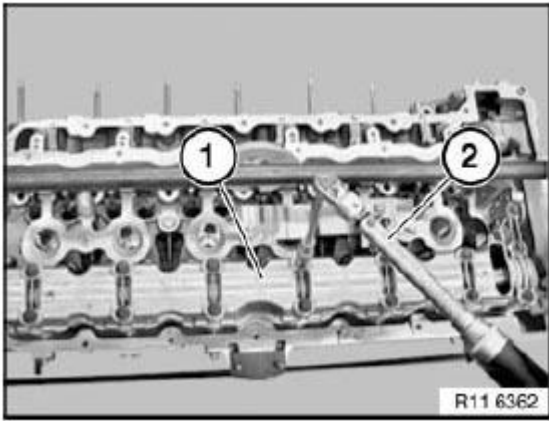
Lifting Lower And Upper Bearing Strips With Camshaft
